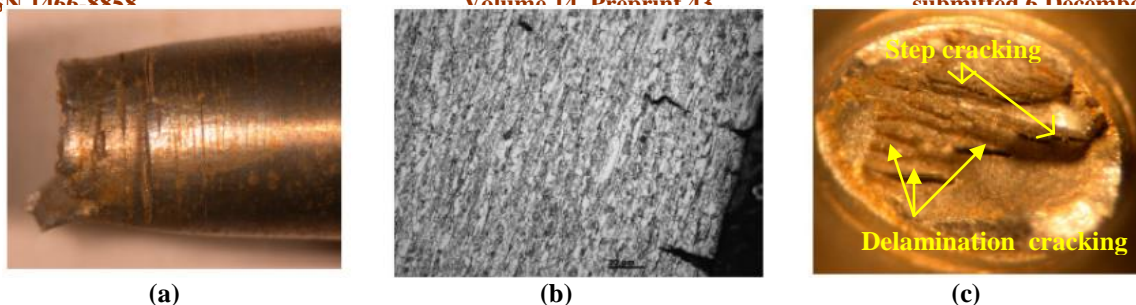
Fracture surfaces of SSR test samples. (a) Secondary cracks. (b) Internal transverse cracks. (c) Metal delamination cracks.
